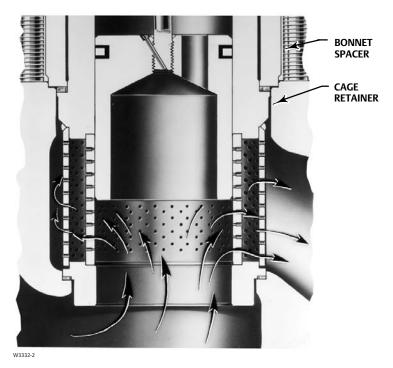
Whisper Trim III Cage in NPS 12 x 8 Fisher EWNT-2 Valve with Seat Ring Threaded Into the Cage
